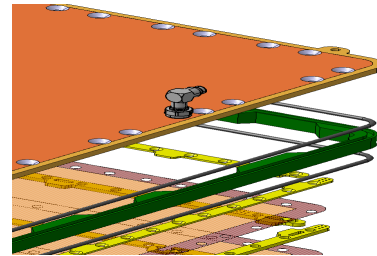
Exploded view of a GE1/1 chamber, including also the design of a gas plug fixed onto a GE1/1 readout board [17].
